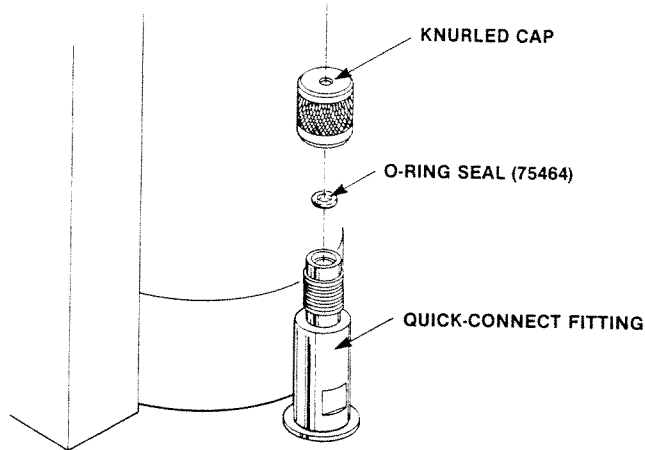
QUICK-CONNECT FITTING ASSEMBLY
